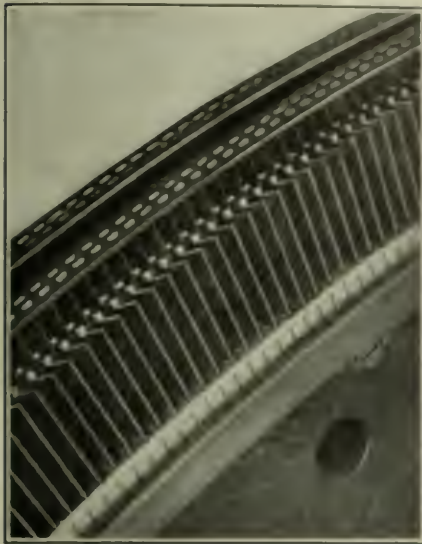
SECTION OF WHEEL RIM AND BLADES
